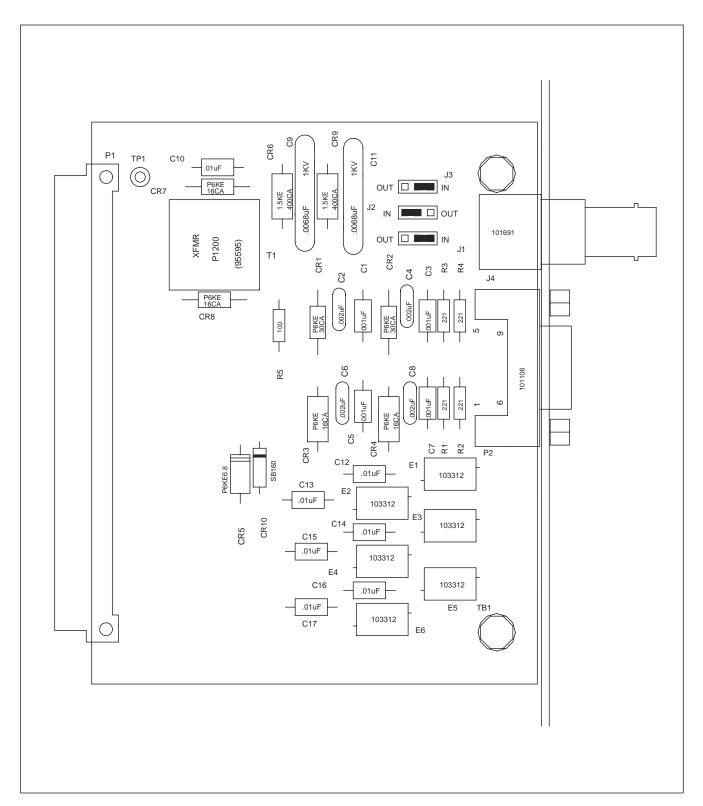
Component Locator Drawing, RFL 9780 SOE/IRIG-B I/O Module
